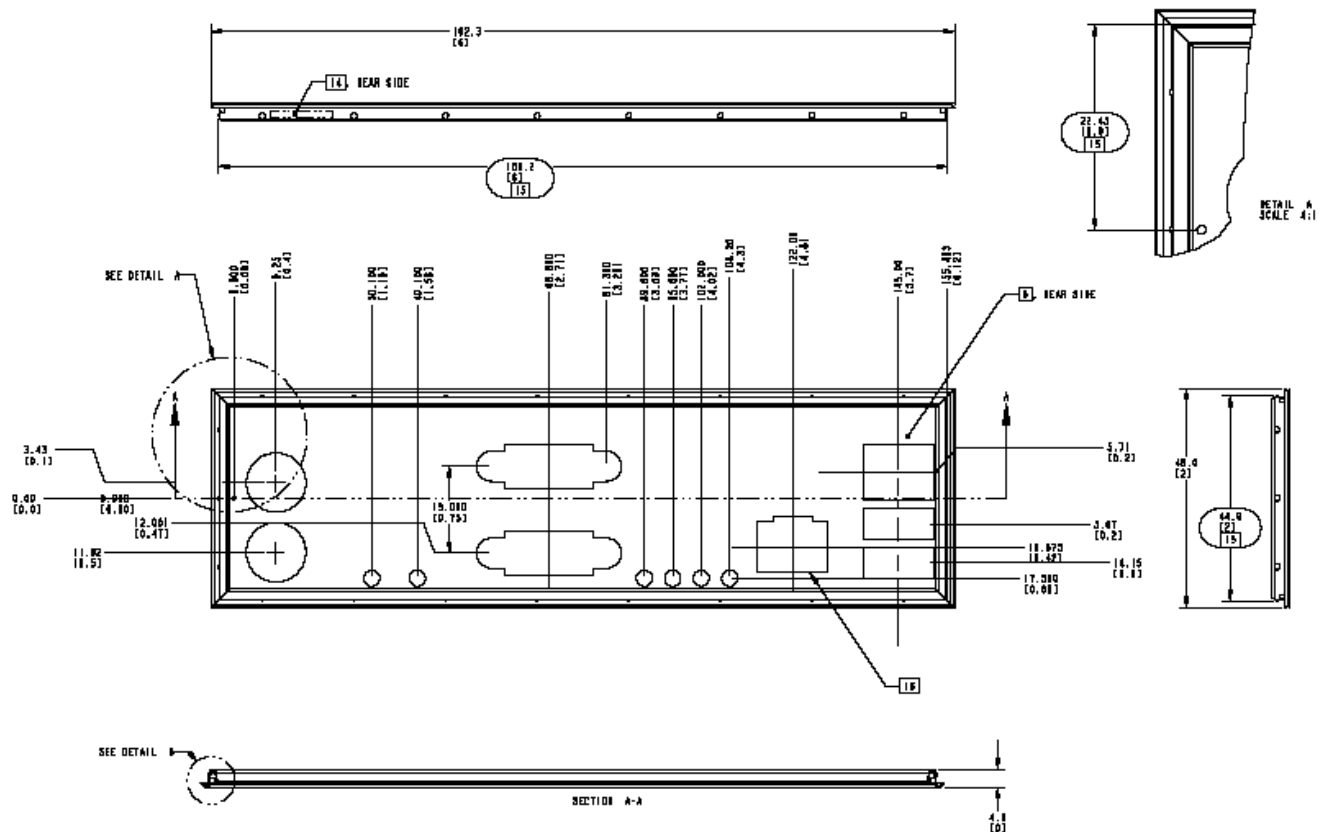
Pedestal Mount I/O Shield Mechanical Drawing for Intel® Server Board S3000AHV
